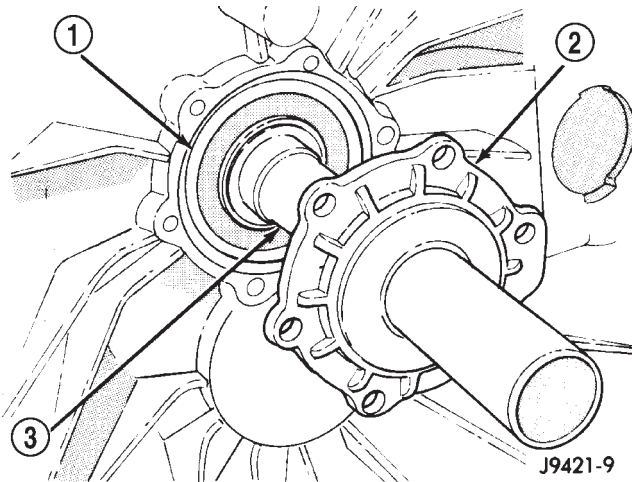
Input Shaft Bearing Retainer Removal—Typical
